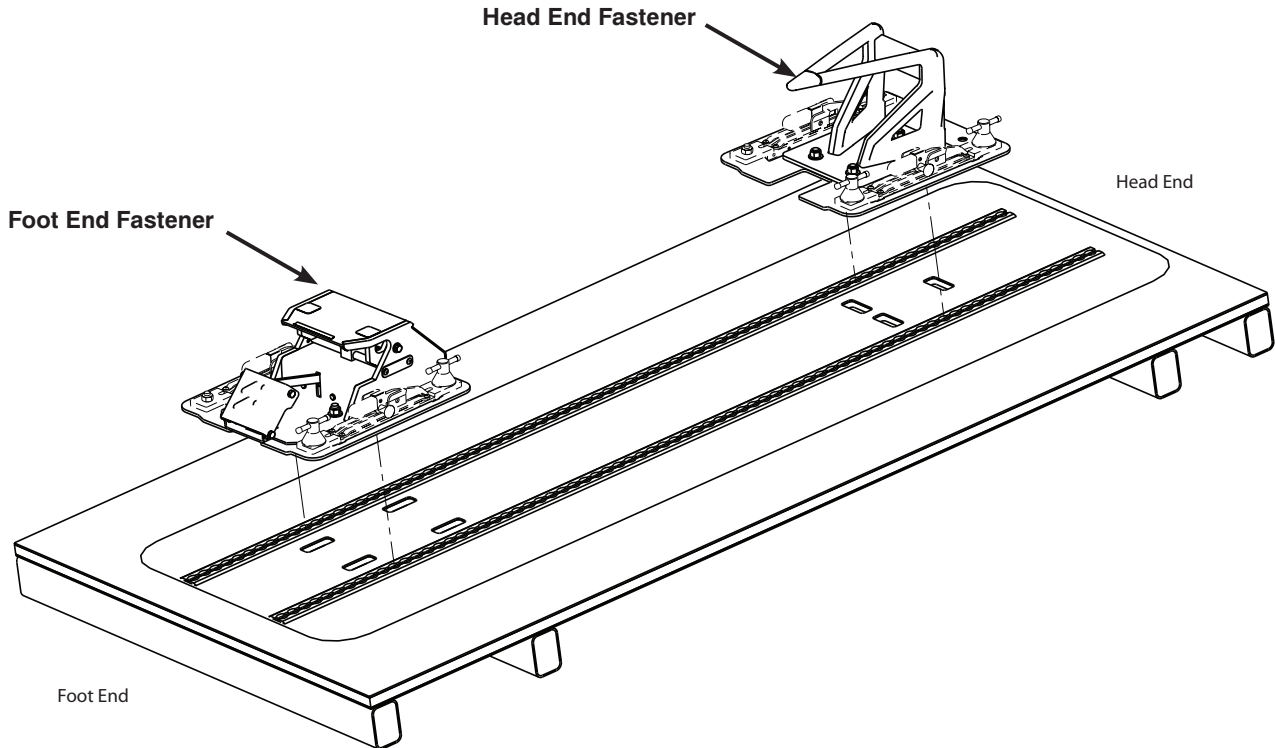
Head End and Foot End Fastener - Floor Track Installation
